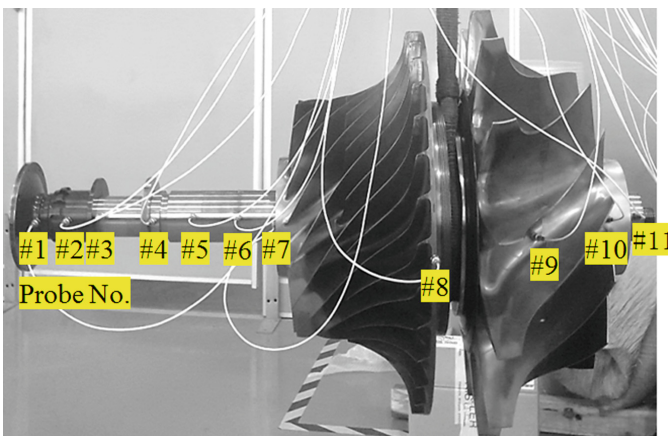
Probes location for modal testing of built-up gas turbine rotor of ZK2000 engine
